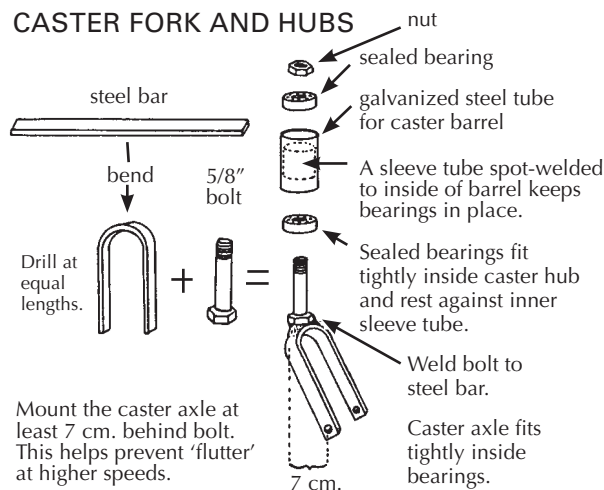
## DETAILS OF HOW TO MAKE WHEELCHAIR PARTS
